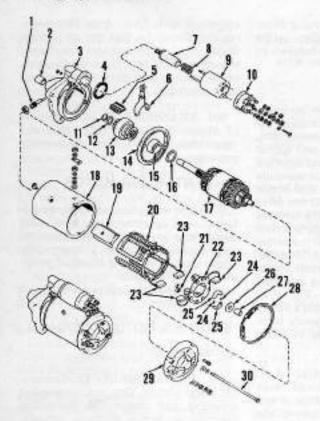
Exploded view of typical Lucas starter assembly. Note construction may very slightly accor-ding to model, but basic design remains the same.
